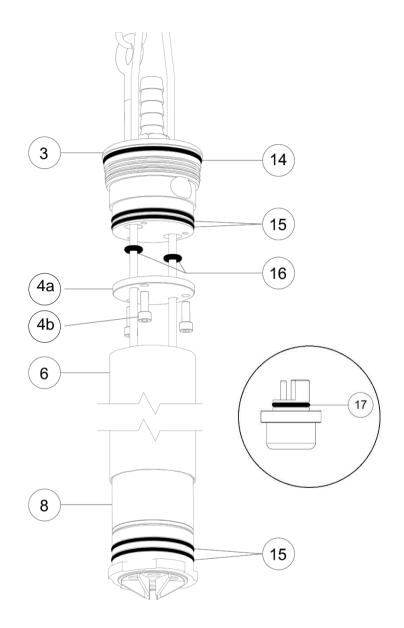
Geosub 2 Pump, O-Ring Diagram
